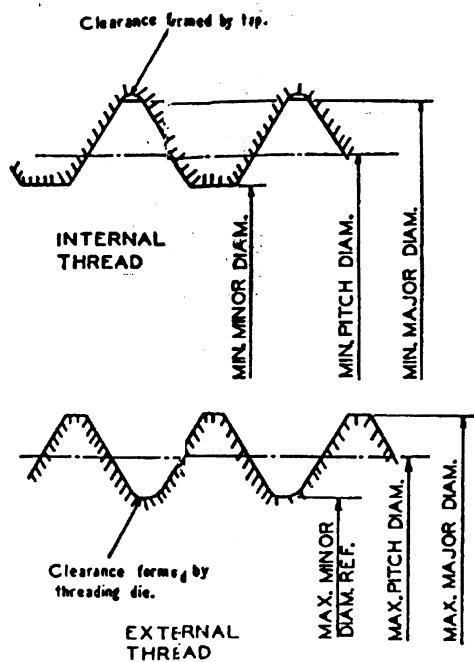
Thread dimensions to be determined for a special thread.
